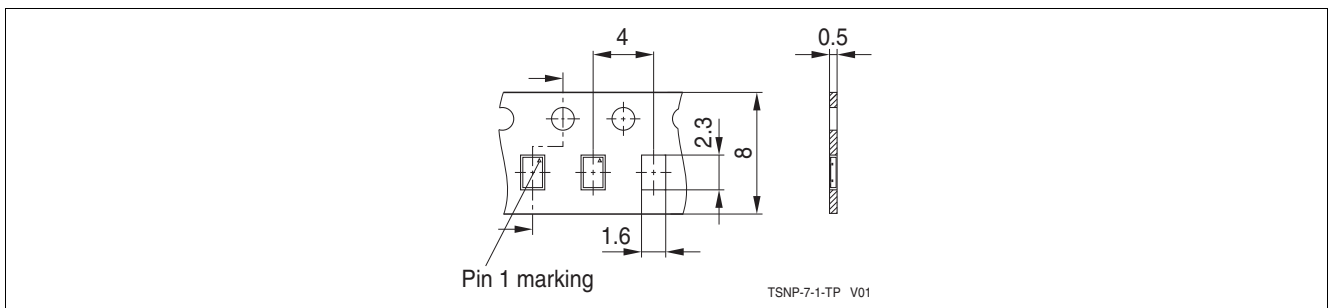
Tape & Reel Dimensions TSNP-7-1 (Ø reel 180, pieces/reel 7500)
